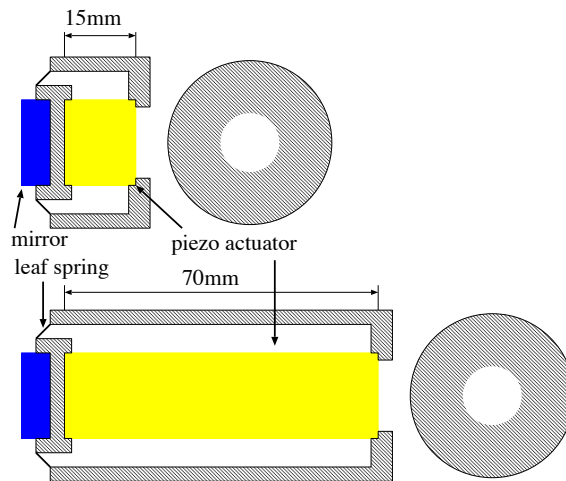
Close view of mirror attachment with the piezo actuator. Two mirrors are attached to the piezo actuator via the leaf spring. The piezo actuator is cylindrical with a hole to let a laser beam go through.
